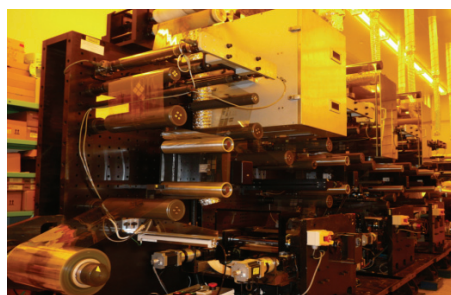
Roll-to-roll gravure printing equipment used for experiments
